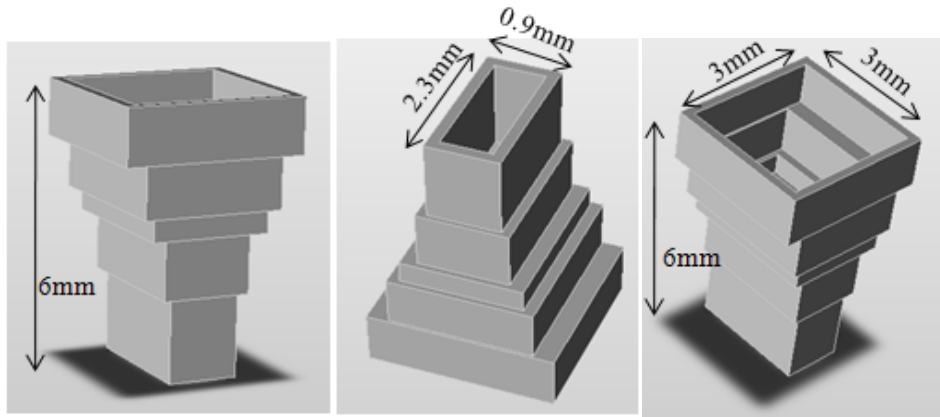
Stepped horn unit cell designed for E-band 3D View and dimensions [6].
